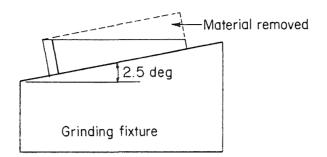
FIXTURE USED TO FABRICATE MILD-STEEL TOOLING ELEMENTS
